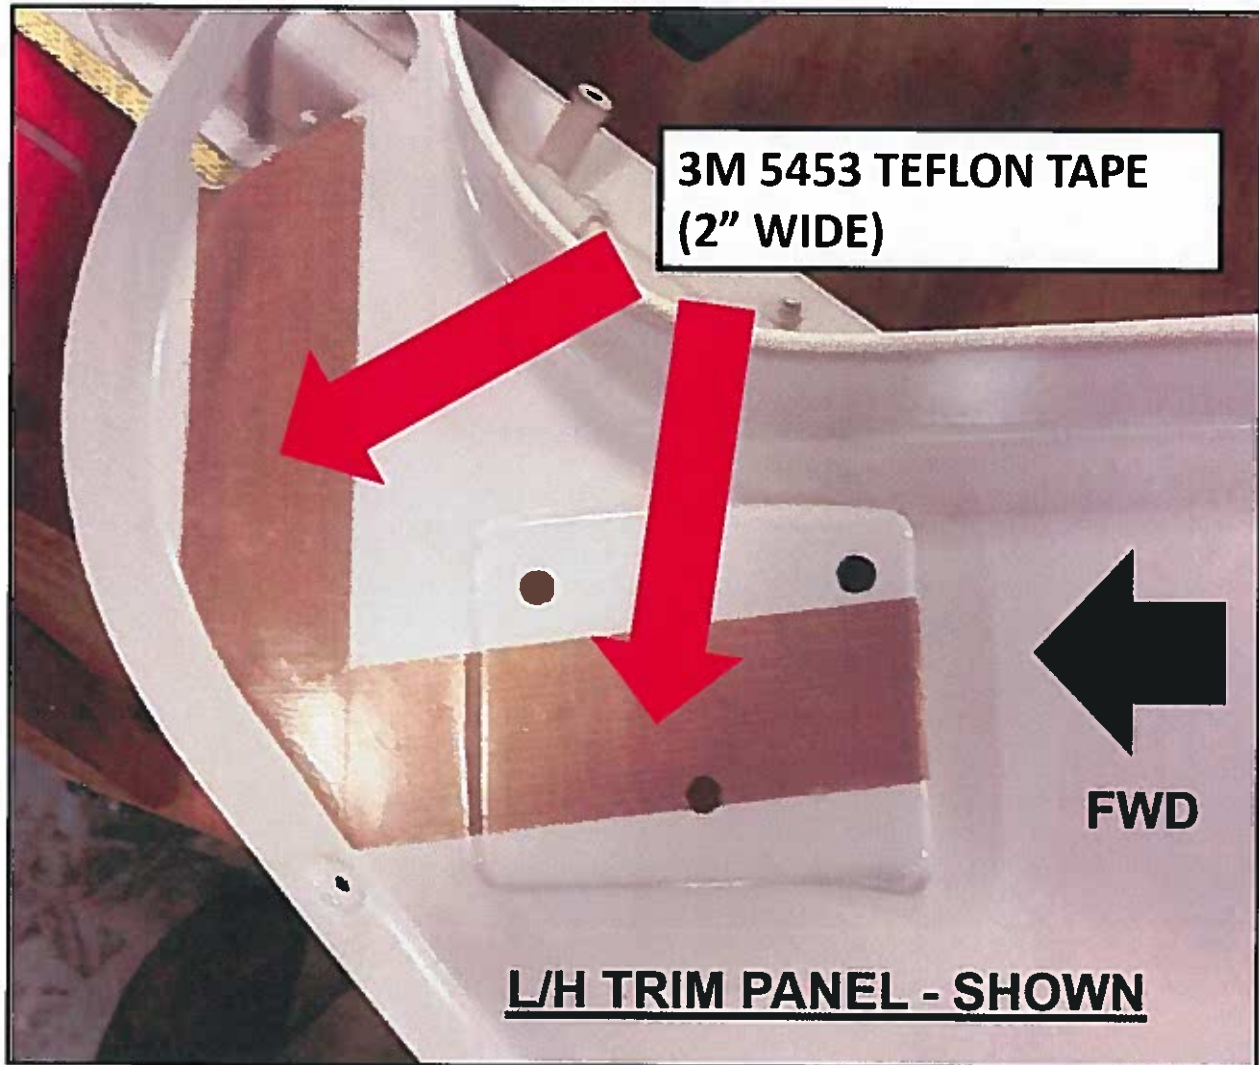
CABLE ASSEMBLY INSTALLATION
